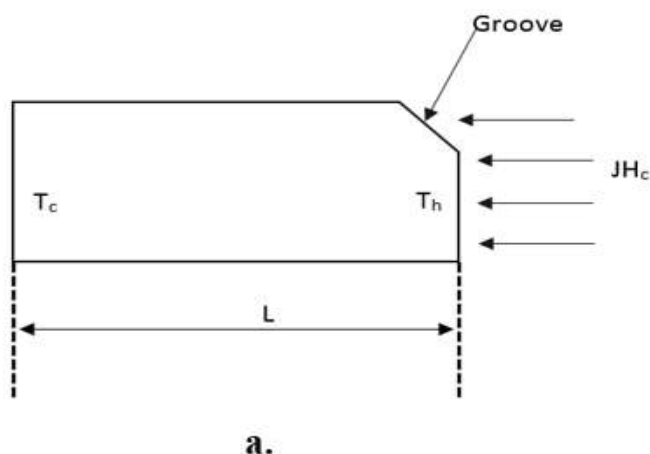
Weld profile showing direction of heat energy along the inner face of the weld
